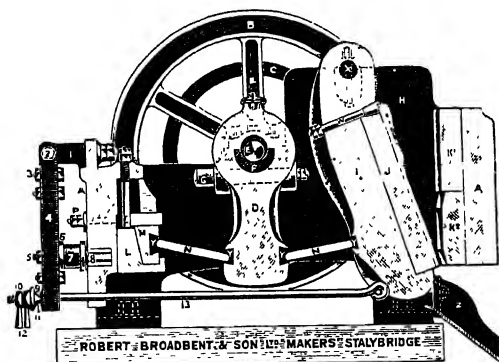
Section of Broadbent's Improved Blake Stonebreaker.
